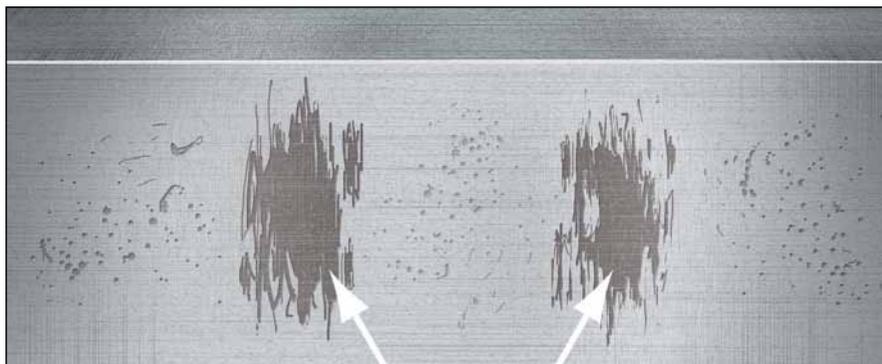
Inadequate spray pattern on the tooth flank; inadequate spray patterns normally lead to scuffing in these highlighted areas. Additional, correctly spaced spray nozzles and higher air pressure are required to improve the lubrication film.
